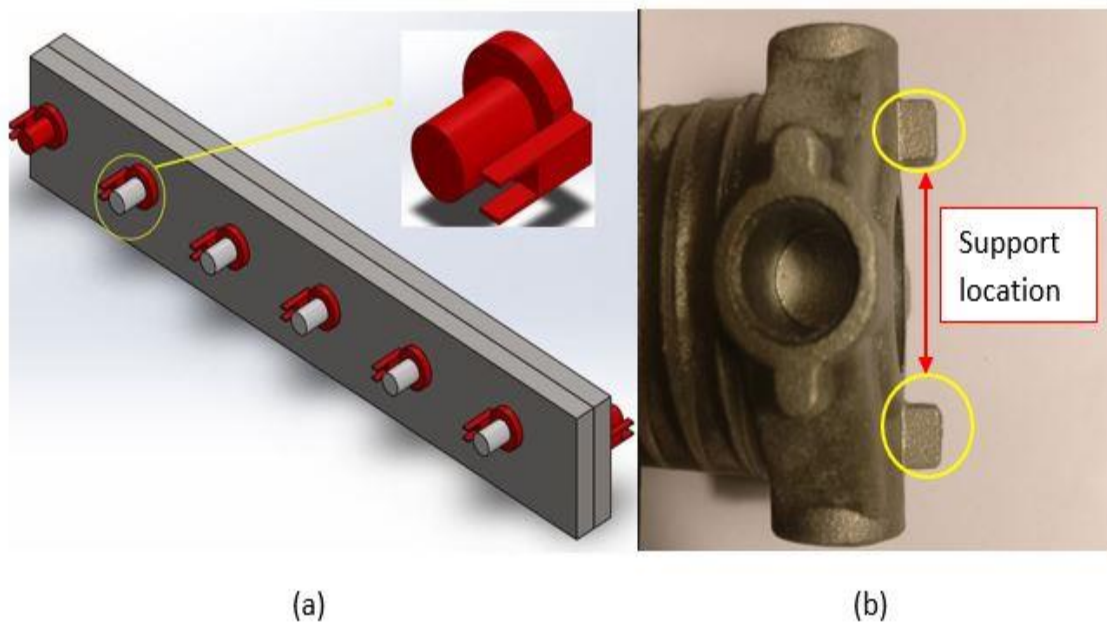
(a) Design 3 (b) Finding the support location to rest on the jig.
